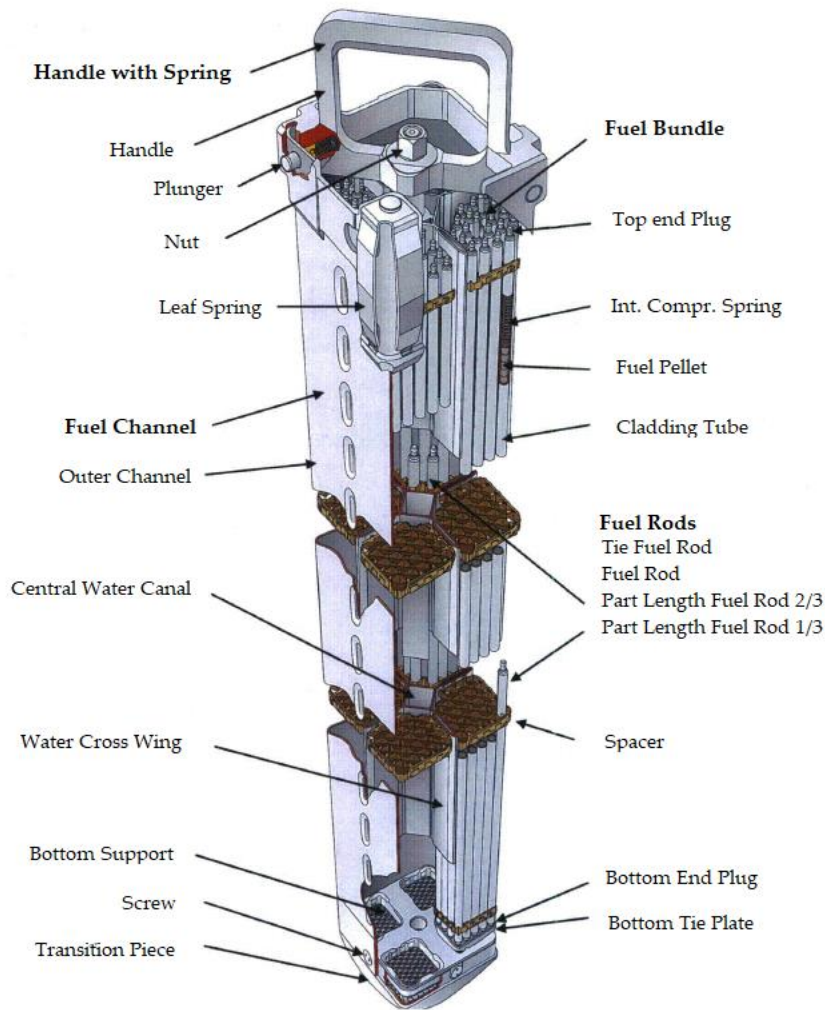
BWR SVEA-96 Optima 3 fuel assembly design (courtesy of Westinghouse Electric Company [13])
